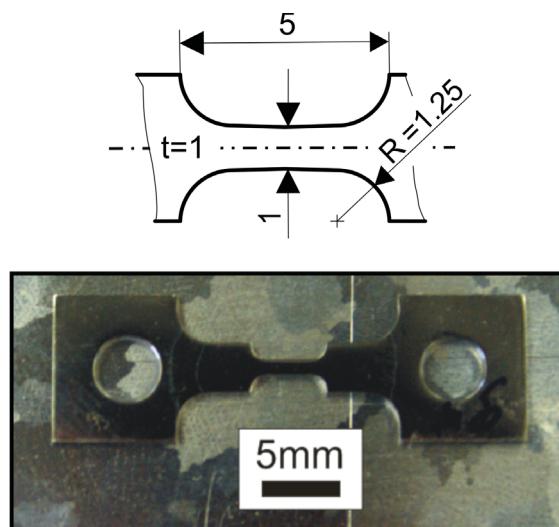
Tensile test sample fabricated out of a coarse grained sheet.
